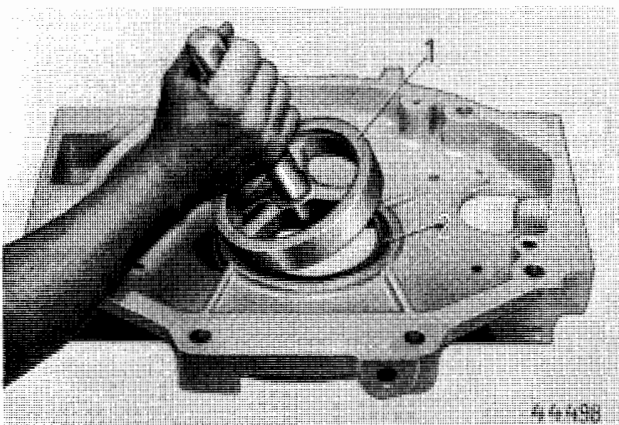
Driving in Oil Seal Ring of Flywheel Cover, Using Special Tool No. JDE 2
